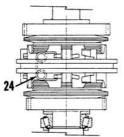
Attach ends of return springs (24) to holes in pressure plates.
